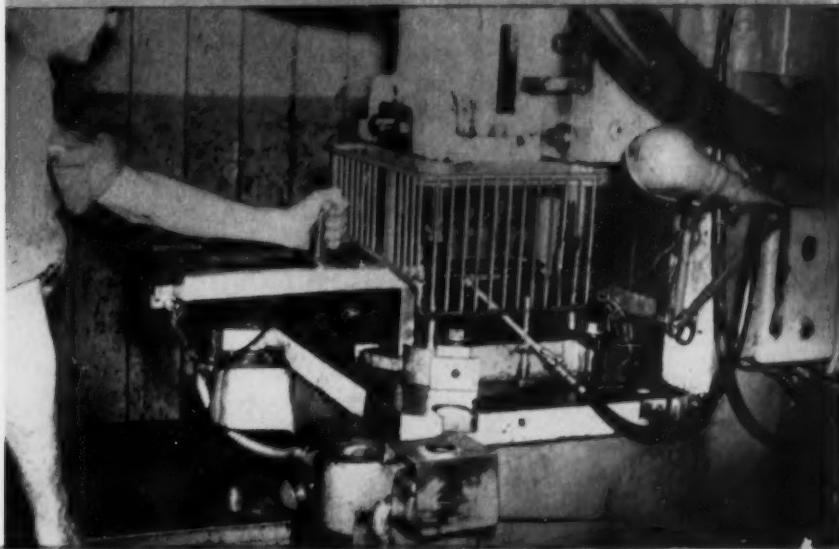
This illustration shows an example of a shuttle feed in the "in" position. This view also shows the air ejection nozzle which provides for safe removal of the parts produced.
